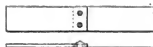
Single-riveted joint, by hand, snap-headed.
